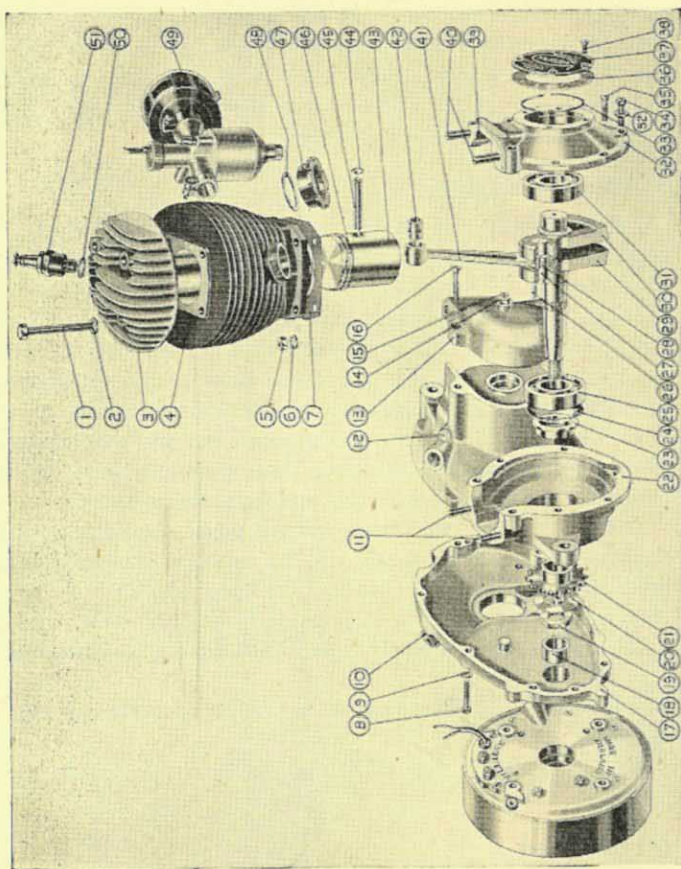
EXPLODED VIEW OF ENGINE, MARK IF ENGINE-GEAR UNIT.
